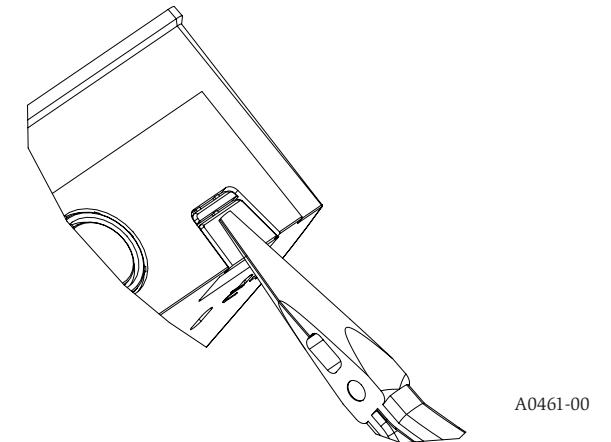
1/2 INCH KNOCKOUT REMOVAL FOR SURFACE MOUNT BACK BOX
